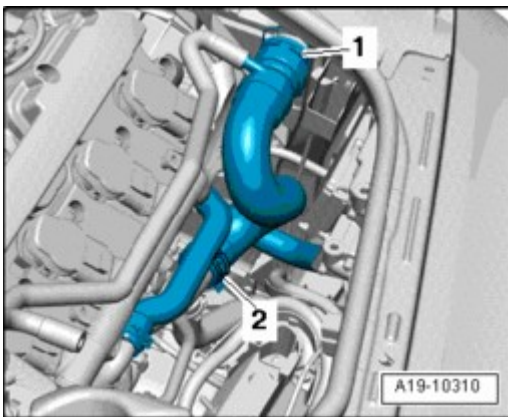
Removing Coolant Hose From Radiator And Right Coolant Pipe
